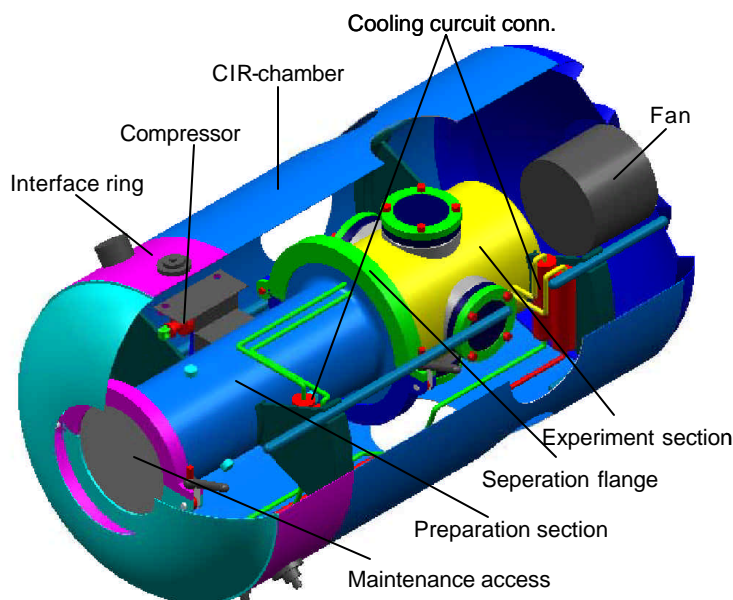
EHPI process chamber installed to the CIR combustion chamber
